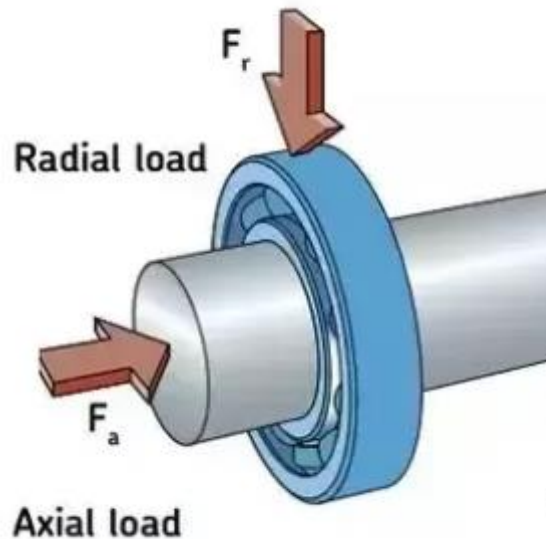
Force directions on the shaft (Kaydon Bearing Solutions, 2018)
